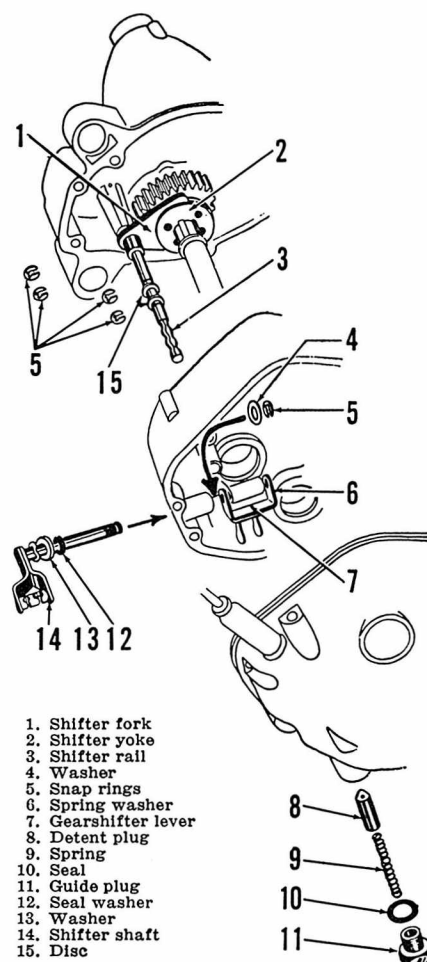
View of Mo-Ped two speed gear shift mechanism.
